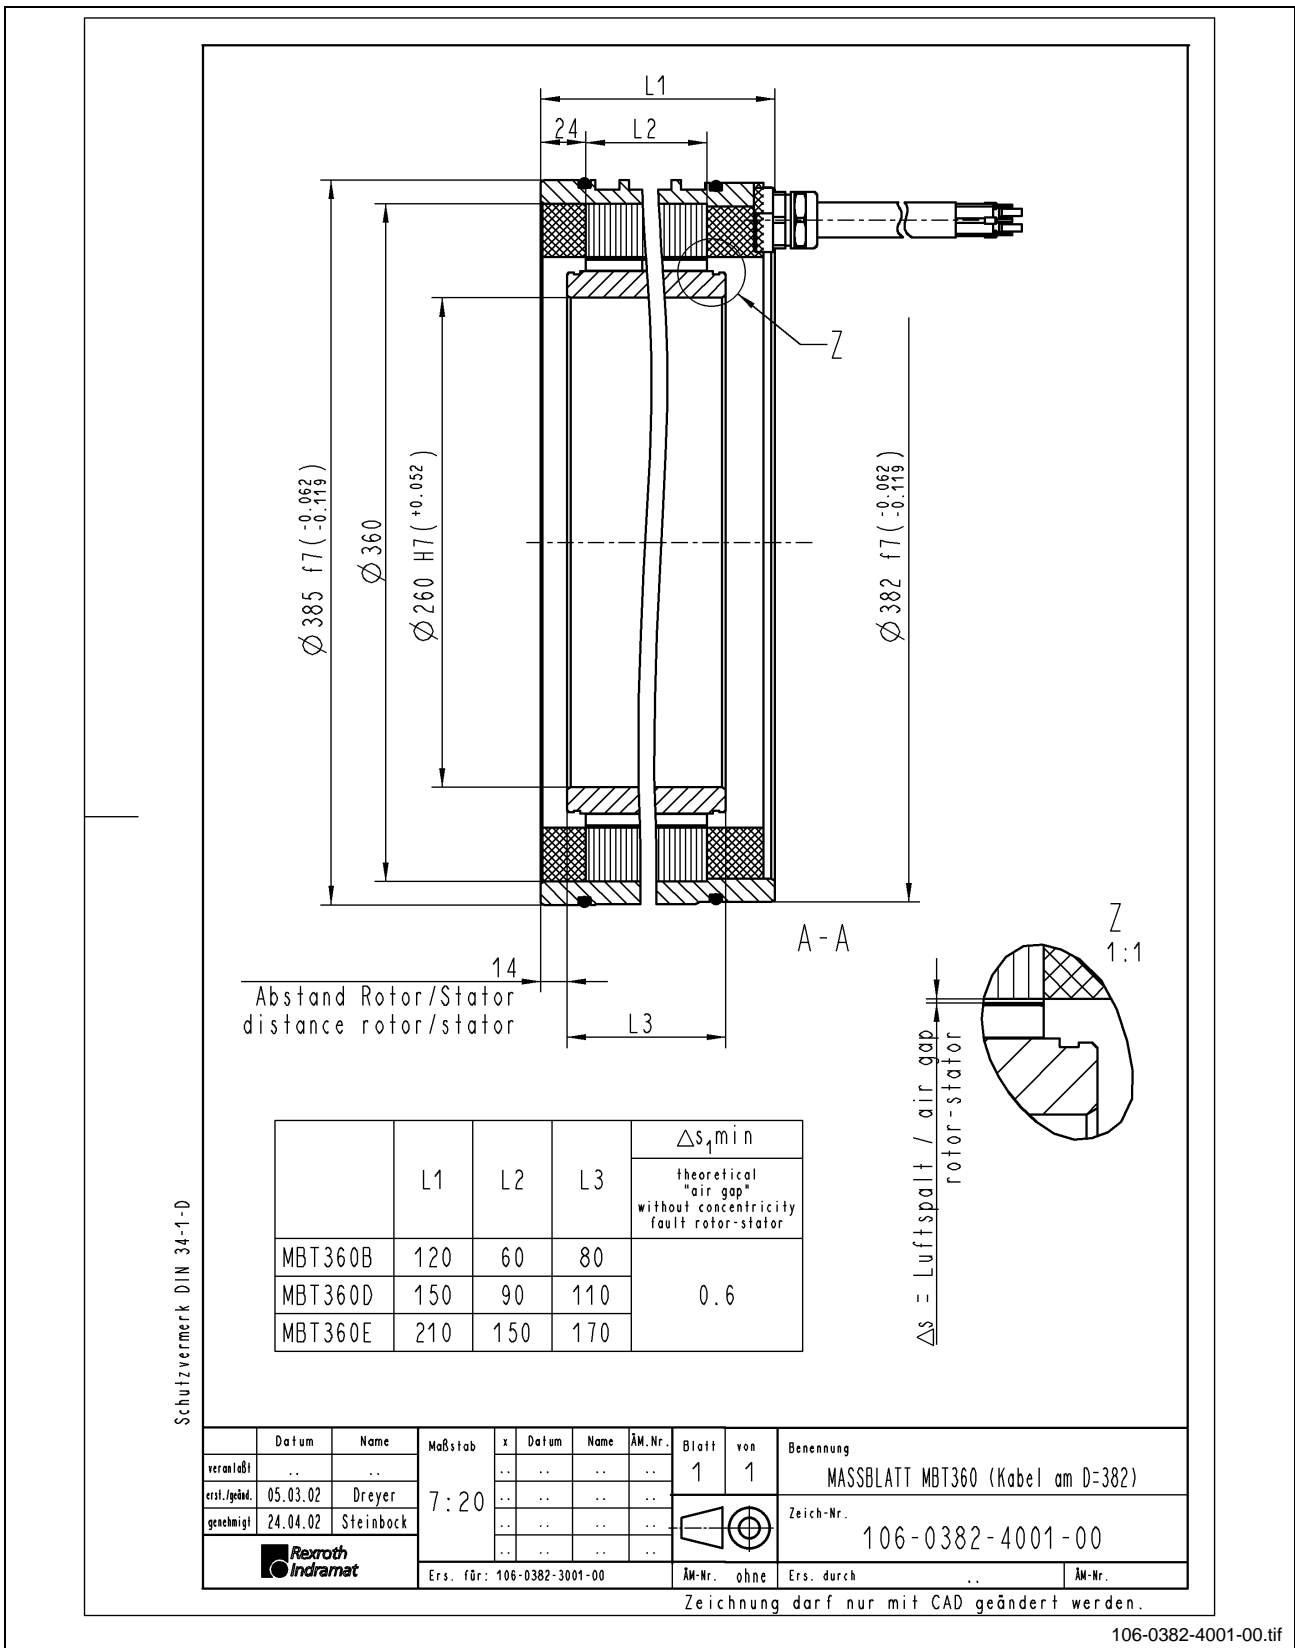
Dimension sheet size 360, electrical connection "SN"
